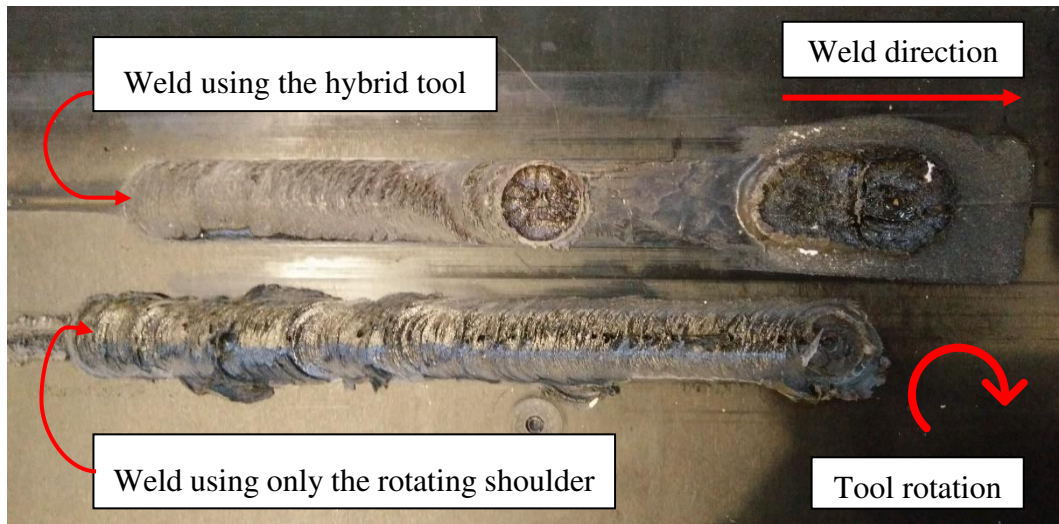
Welds obtained from hybrid tool (top) and weld from rotating shoulder tool (bottom)
